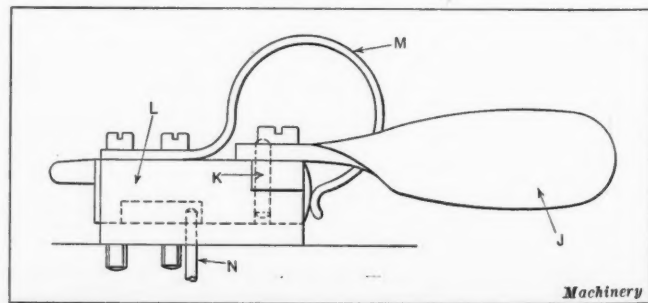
Detail View of Mechanism for locating Work on Fixture
